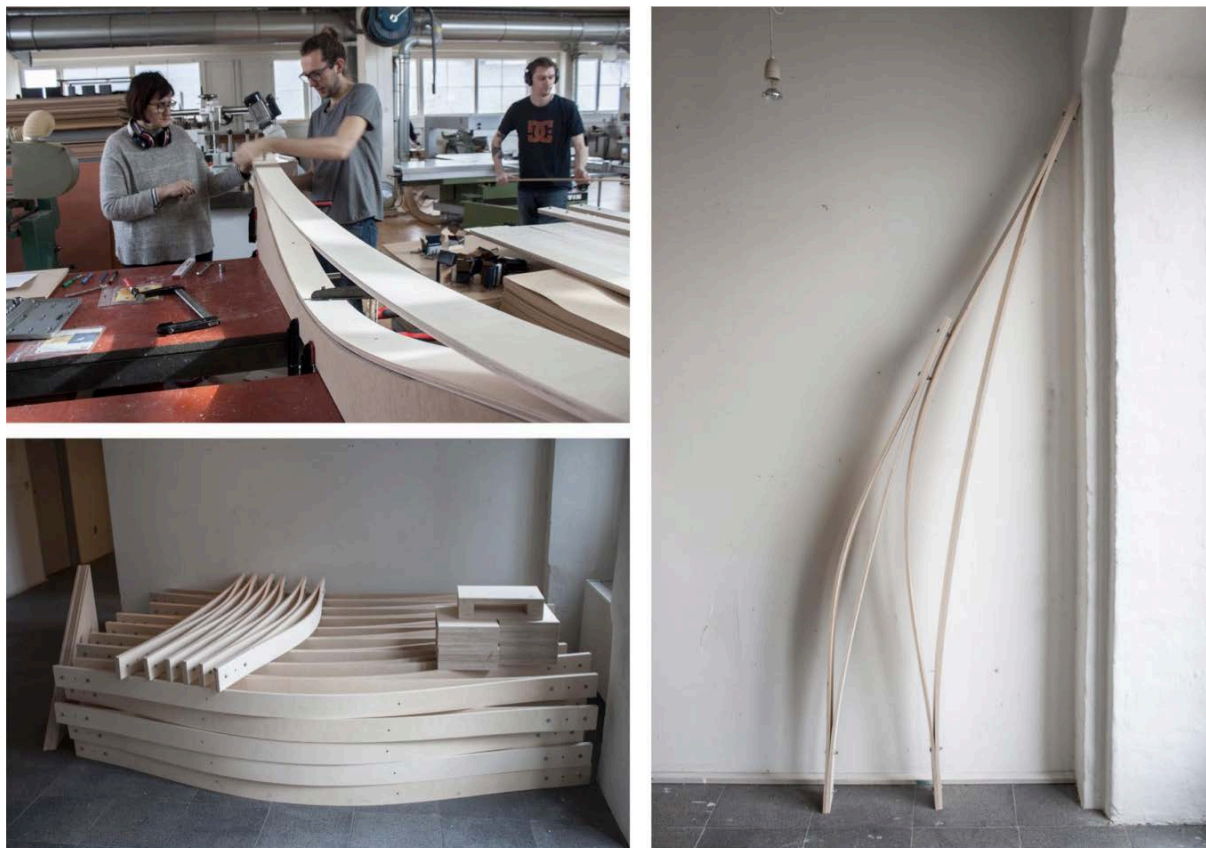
The double layered components consist of two plywood laths of 12mm, connected at the ends. Pushing and fixing the top layer onto a jig simplifies the fabrication process, allows manual assembly by one person (top left). The kit of parts for the structure consists of only two different pieces (right). Thanks to the discretisation of the elements in the reciprocal organisation, the elements remain fairly short and the full set of components very compact (bottom left). (pictures by Jack Cripps)
